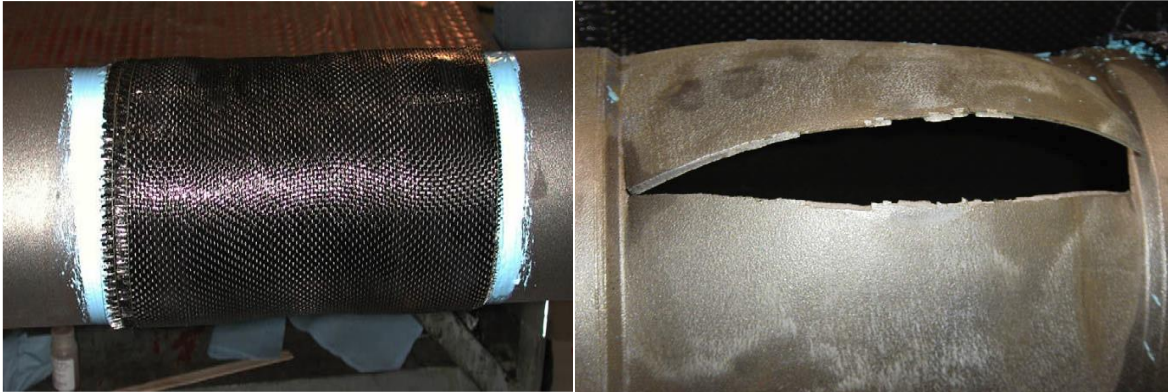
Wrapping epoxy wetted carbon fabric around the defecting and b Example of a ruptured vessel with an axisymmetric defect [114].
